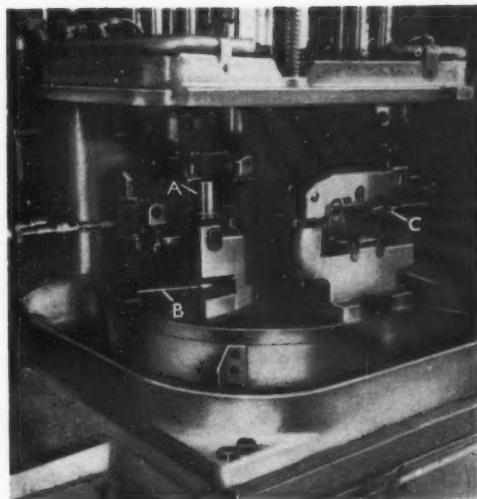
Close-up View of the Machine Seen in Fig. 15 Showing the Arrangements for Holding and Locating the Work
